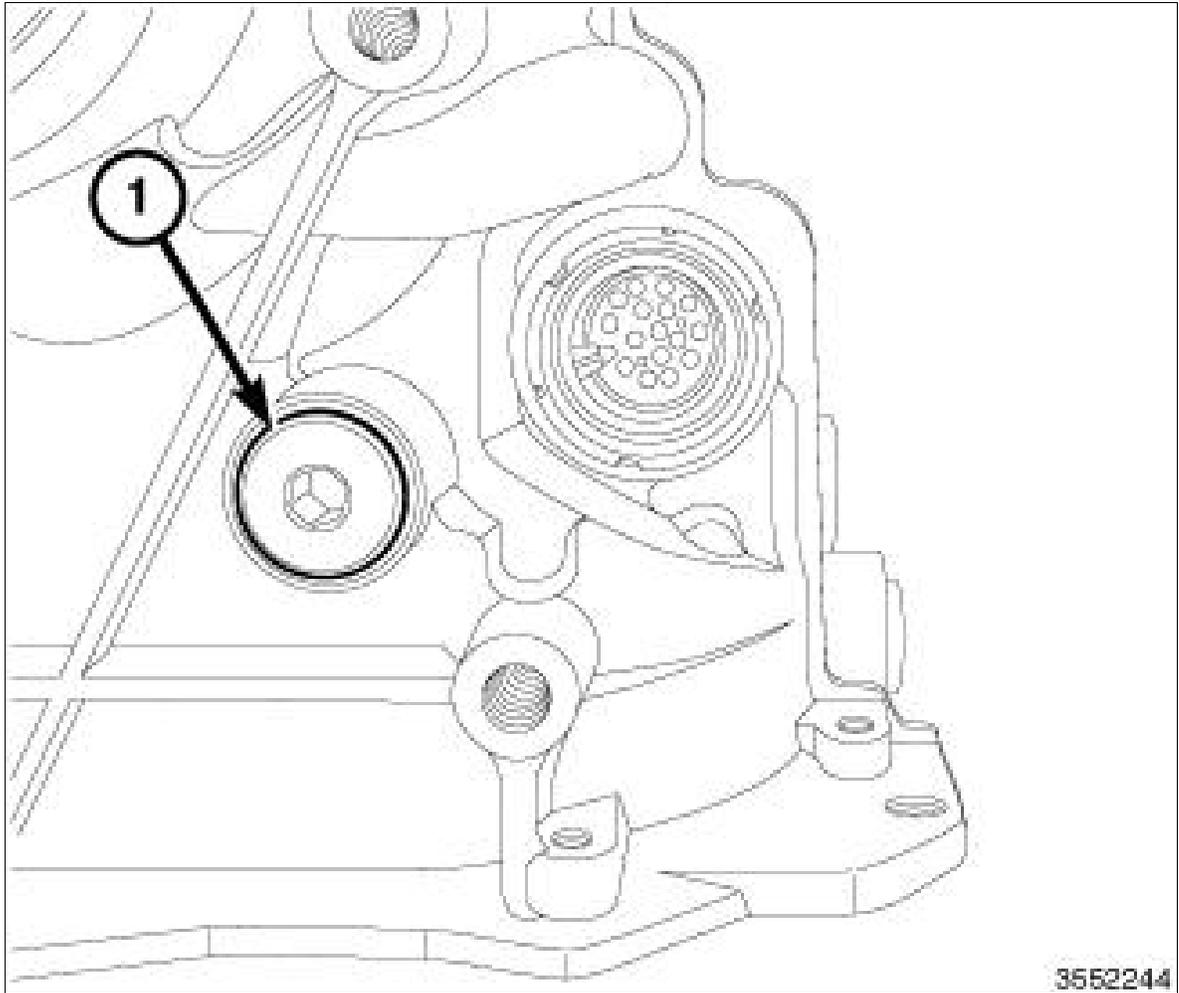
Removing/Installing Park Pawl Shaft Using A Suitable Pin Punch, Park Pawl And Spring
